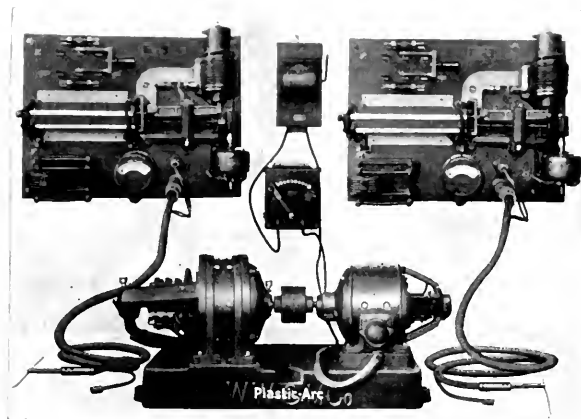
WILSON TYPE OF ARC WELDING OUTFIT.
